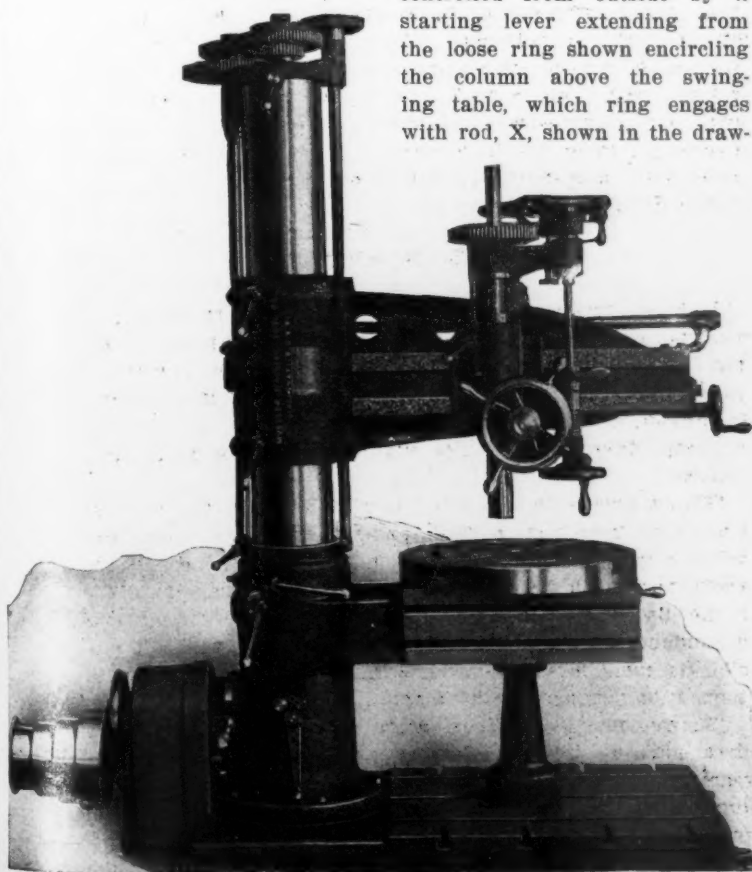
GENERAL VIEW OF THE MUELLER RADIAL DRILL.
